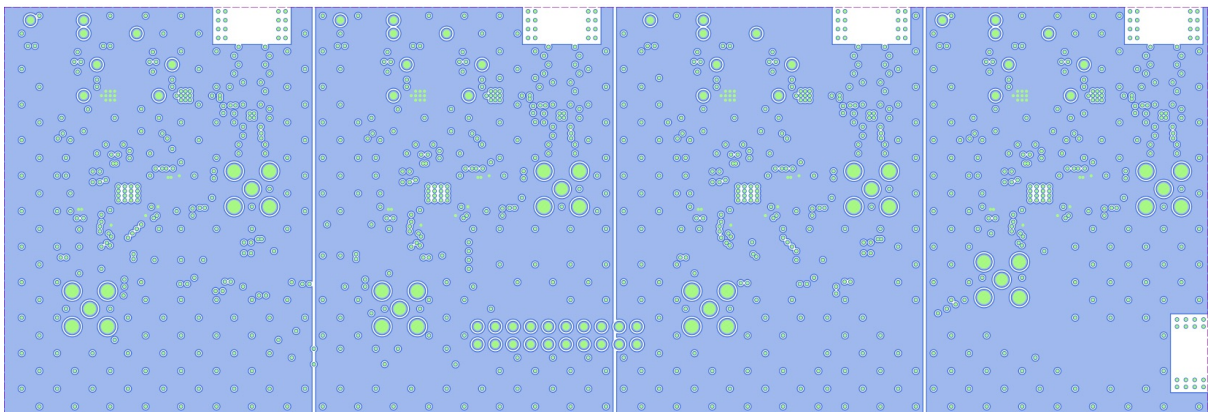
DLL-HPC transmitted signal beamformer PCB inner layer 3
